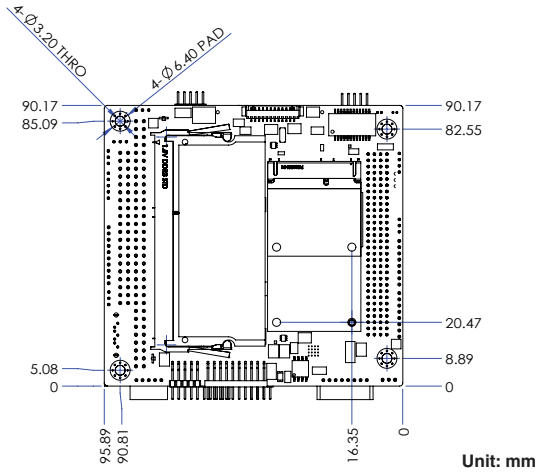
PCM-3365 Mechanical Drawing (Bottom Side)
